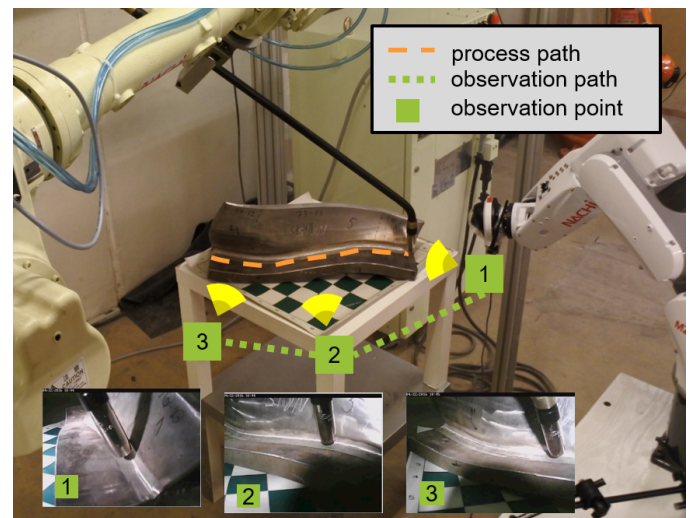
The industrial setup where a monitoring robot (on the right) can inspect a workpiece. The way-points shown in the picture are selected via user adjustments as the process is being carried out. Note that the relative positioning between the monitoring robot and the task robot changes from one point to the other.
